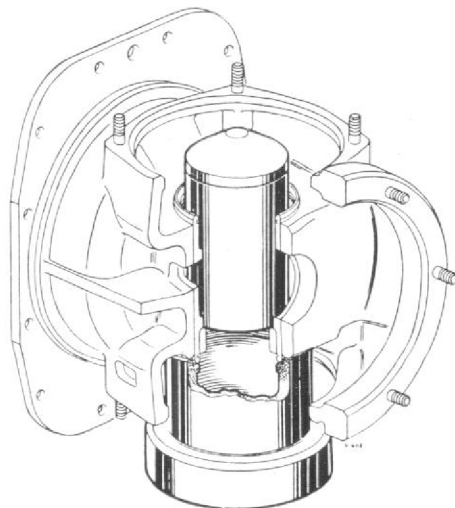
Adapter T.78425 and extractor T.78409 for pressing out lower vertical drive outer roller race.
